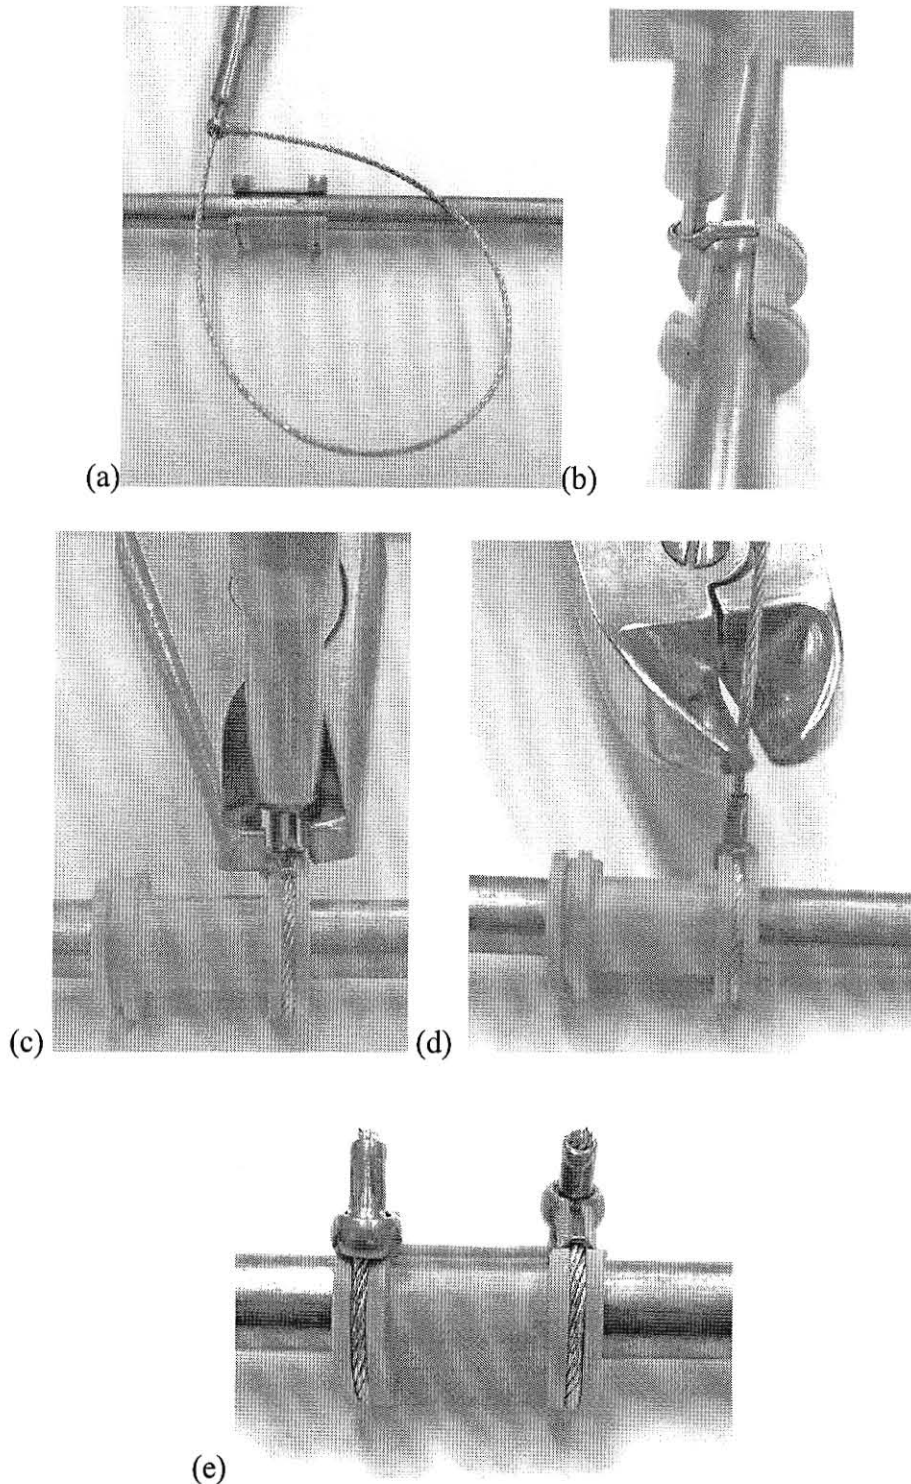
Method of attaching the housing to the rod (a) The housing is snapped onto the rod and the cable is loaded in the tensioning tool. (b) The cable is applied to the cable guide of the housing and tightened to 50 lbs/in². (c) While the cable is held in tension the clamping device crimps the stem of the spherical bearing securing the cable in place. (d) The cable cutter cuts the excess cable. (e) Two cables are used to secure the housing to the rod.
